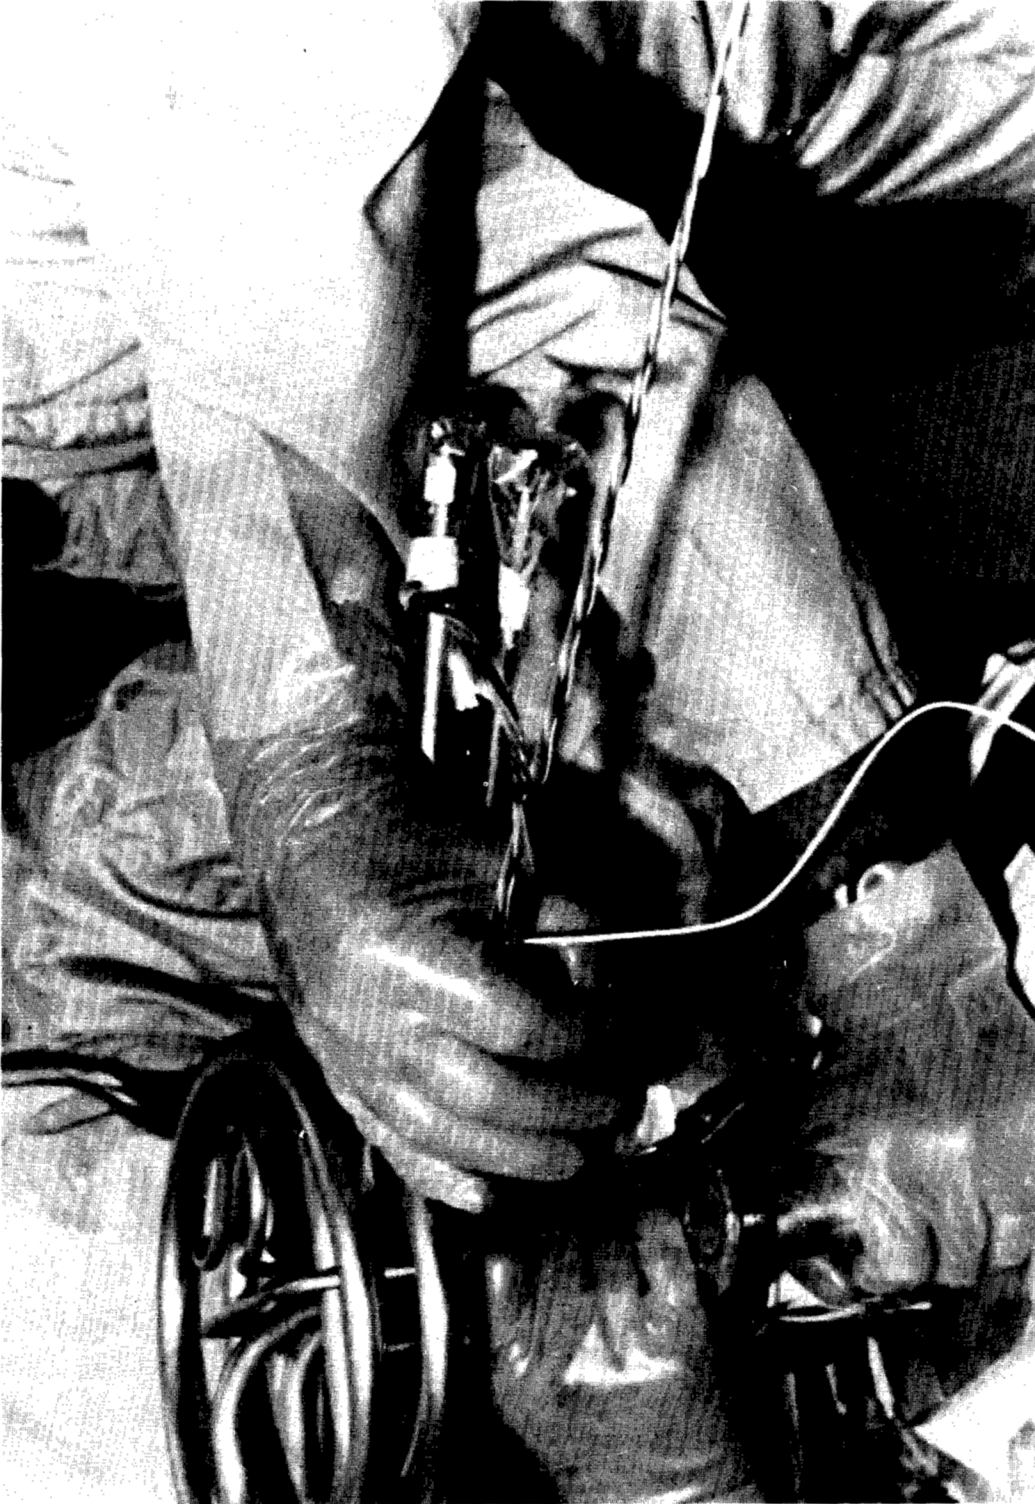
First bundle of heater and fan motor leads pulled through upper coil assembly.
